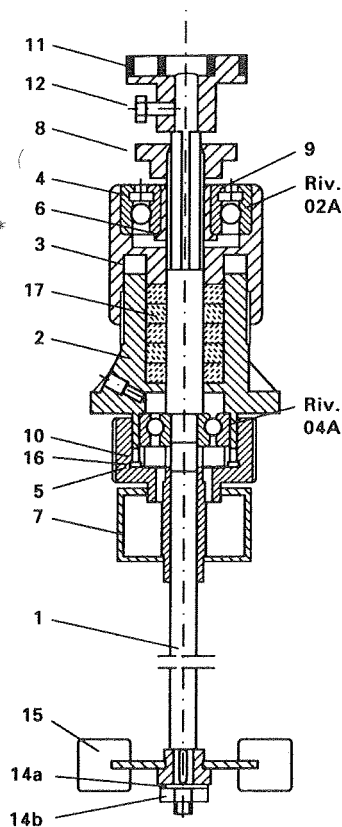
Packed-gland stirrer seal (Chain *et al.*, 1954) (Components: 1, agitator shaft; 2, stuffing box; 3, upper cap; 4, lock ring; 5, lower cap; 6, chuck; 7, greasecup; 8, lock ring; 9, lock nut; 10, distance ring; 11, half coupling; 12, half coupling; 14a, washer; 14b, nut; 15, impeller; 16, shim; 17, packing rings).
